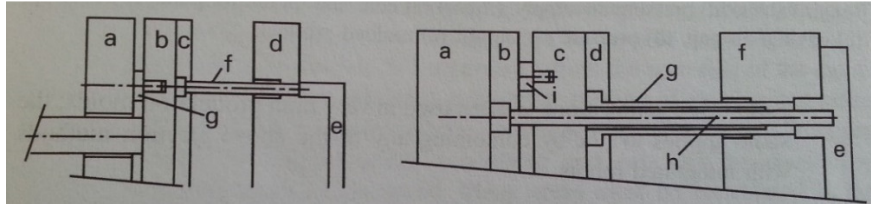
(left) Section through ejector pin mould: (a) backing plate; (b) ejector plate; (c) ejector retainer pin; (d) core plate; (e) moulded part; (f) ejector pin; (g) stop pin.. (Right) Section through sleeve ejector mould: (a) backing plate; (b) core pin retainer plate; (c) ejector plate; (d) sleeve retainer plate; (e) moulded product; (f) core plate; (g) sleeve ejector, (h) core pin; (i) stop pin (Herbert, *Understanding Product Design for Injection Molding*)
